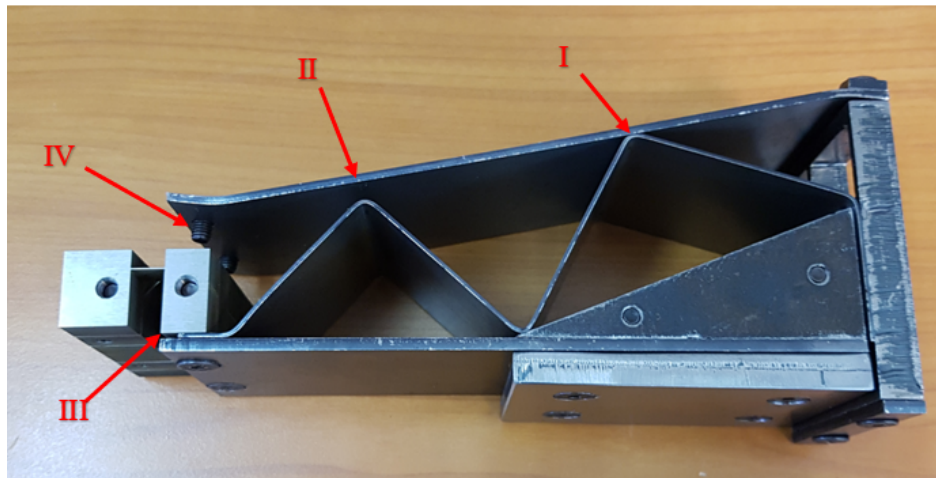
Lining up the cross-straight flexure assembly between the plates.
